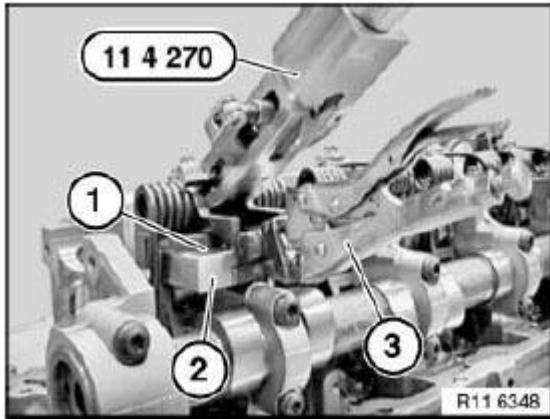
Identifying Gripping Pliers And Guide Block With Special Tool (11 4 270)
